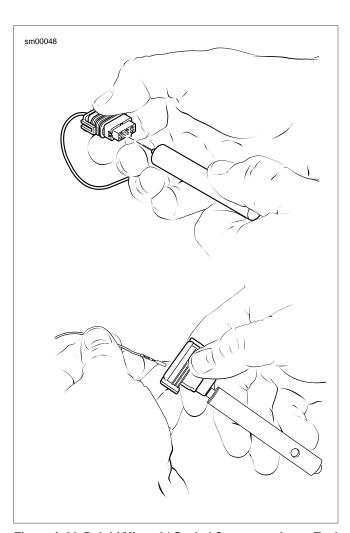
Delphi Micro-64 Sealed Connector: Insert Tool and Remove Terminal
